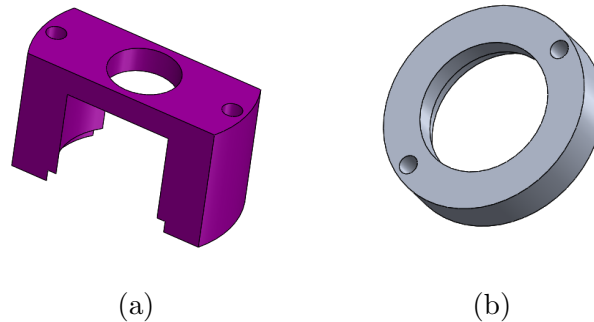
Illustration of two types of bearing housings in the body part: (a) the bearing housing A to fix the potentiometer at both ends and (b) the bearing housing B to clamp the ball bearing in the middle portion.
